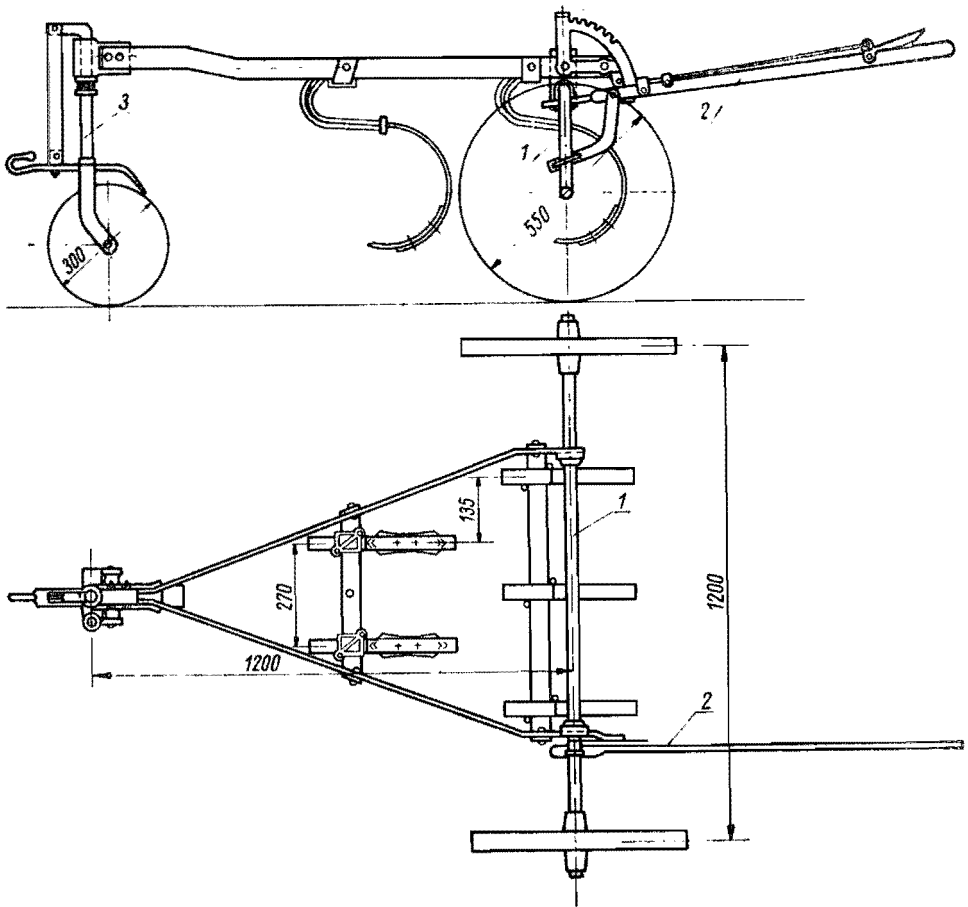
Horse-drawn cultivator: 1—rear wheel axle; 2—lever for control of wheel setting; 3—one-wheel forecarriage.
